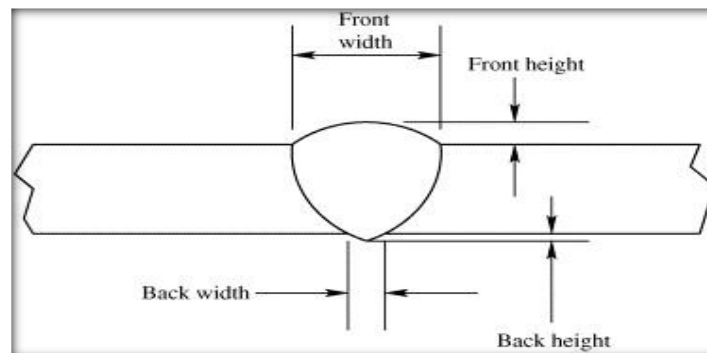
A schematic diagram showing the weld bead geometric parameters
